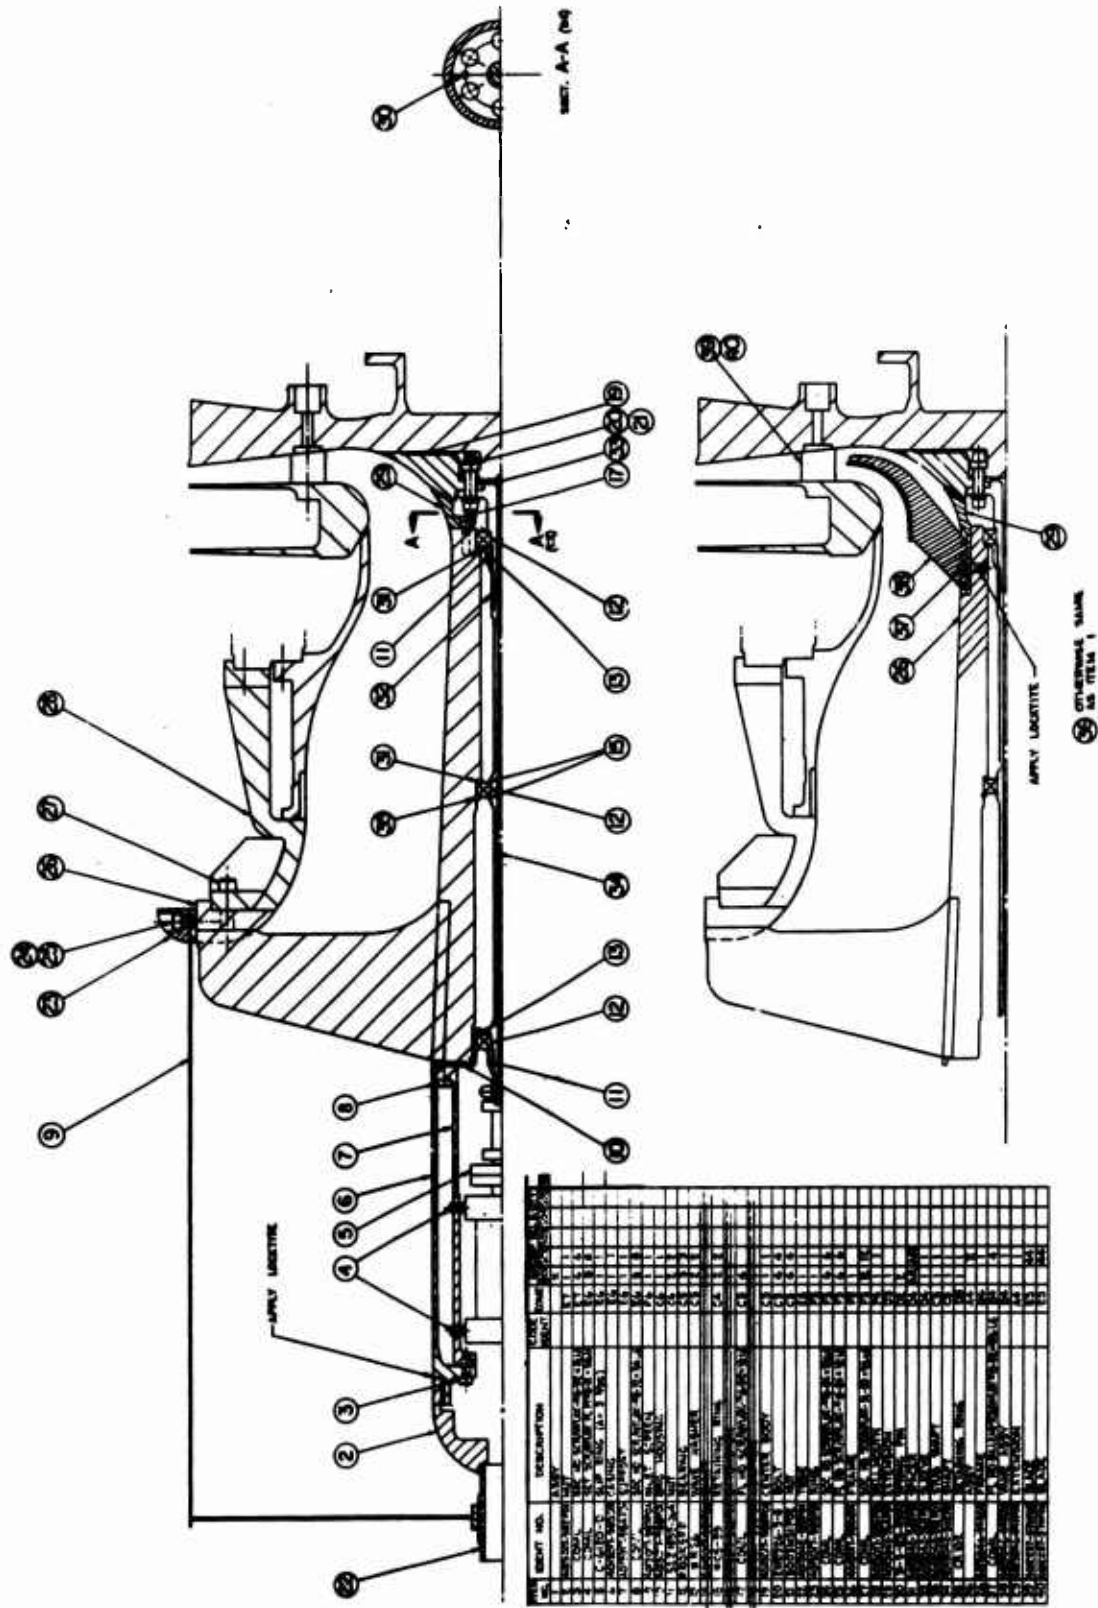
Modified Inlets Used in Buildup D (Upper Drawing) and Buildup F (Lower Drawing).
